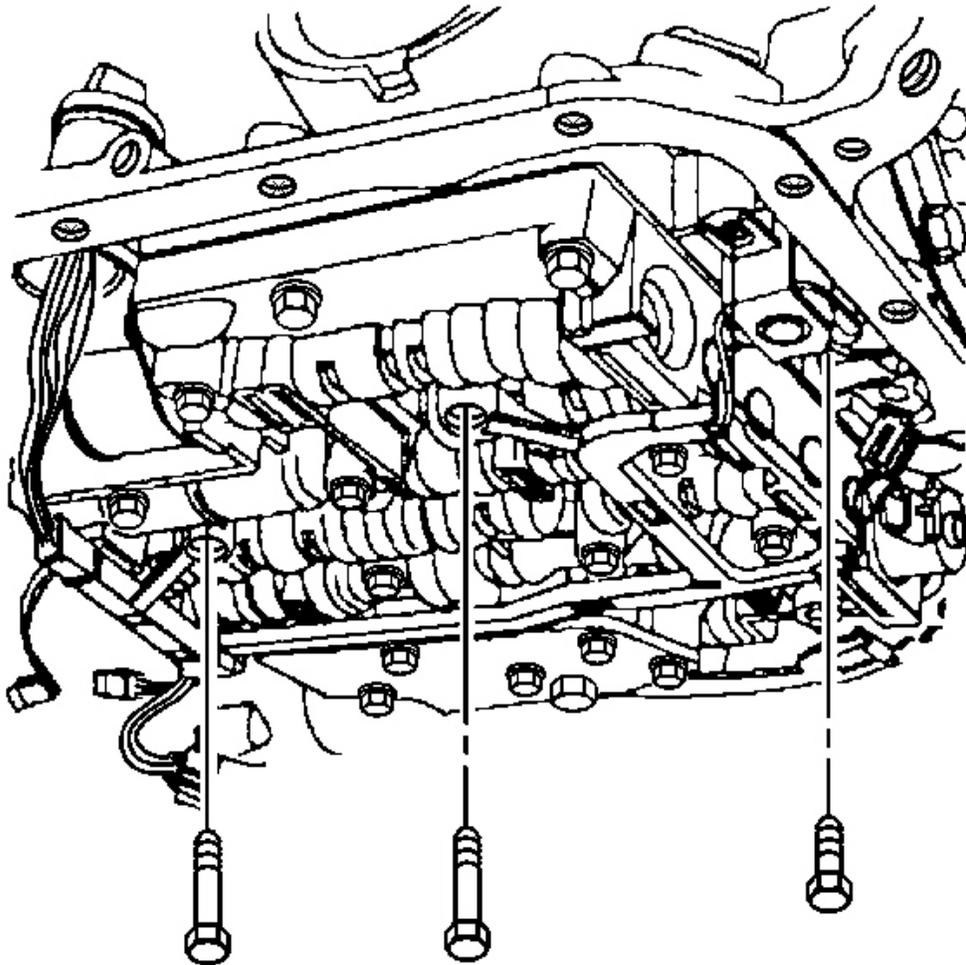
TCC Solenoid Bolts, Valve Body Bolts & Internal Wiring Harness
